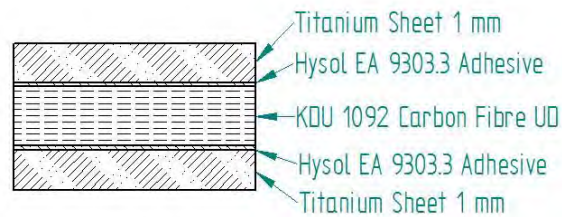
Schematic cross section of a typical specimen (not to scale), adapted from manufacturing drawings
